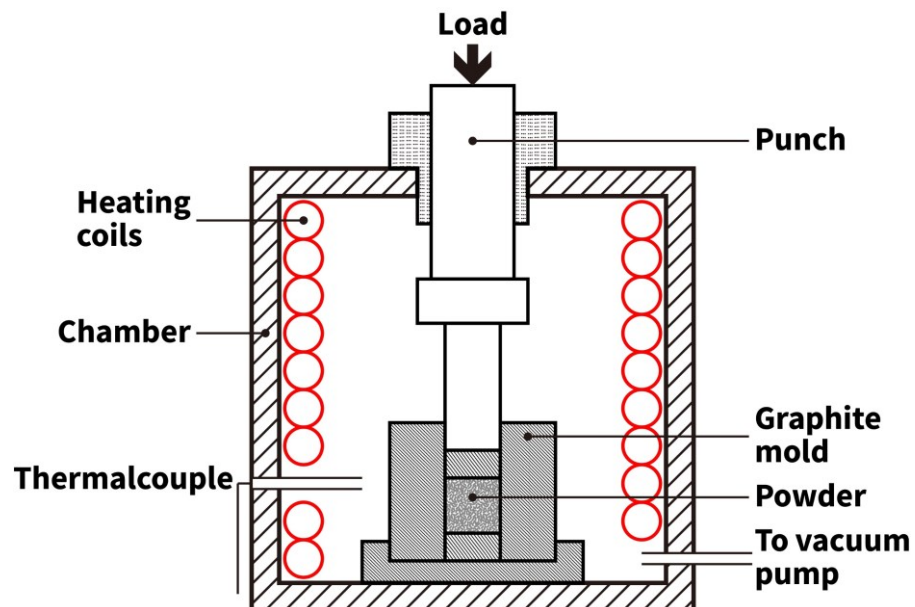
Schematic of a vacuum hot-pressing sintering device
